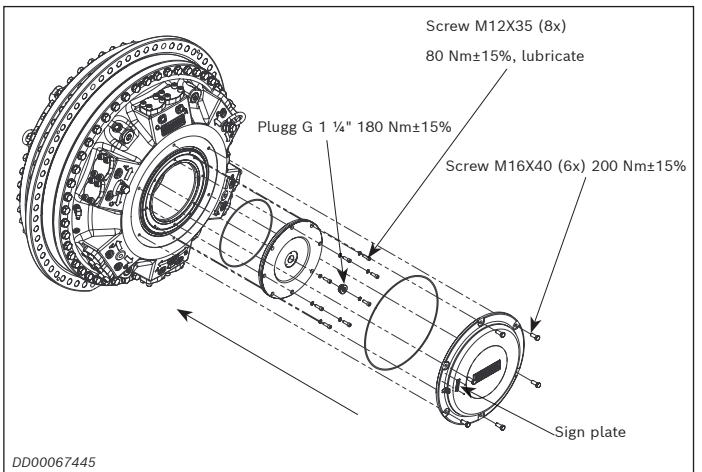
SPDC magnetized bearing holder, sign plate and cover
